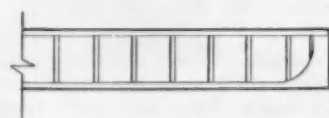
Chem-Milled facing which has few points of critical tolerance
